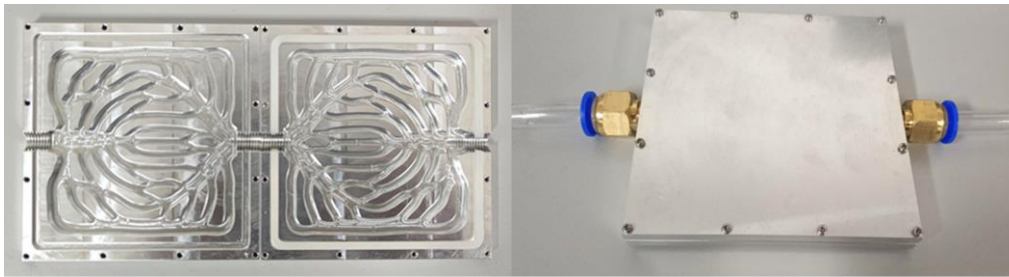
The internal channel and external packaging structure of the cold plate sample.
